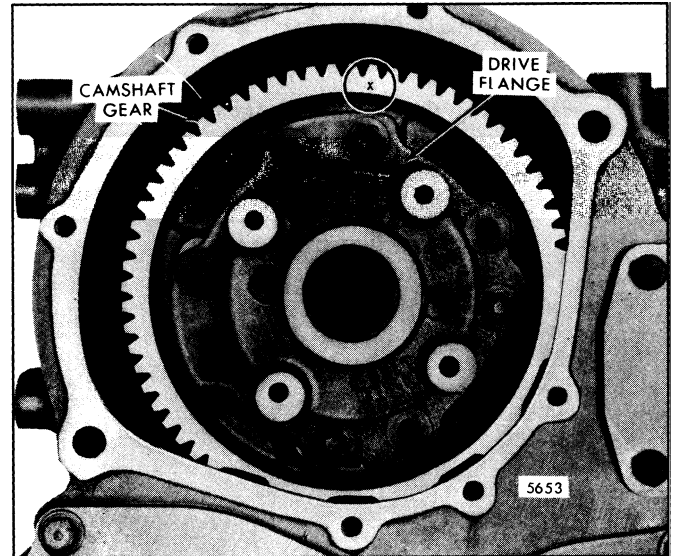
Current Left-Bank Camshaft Drive Flange
